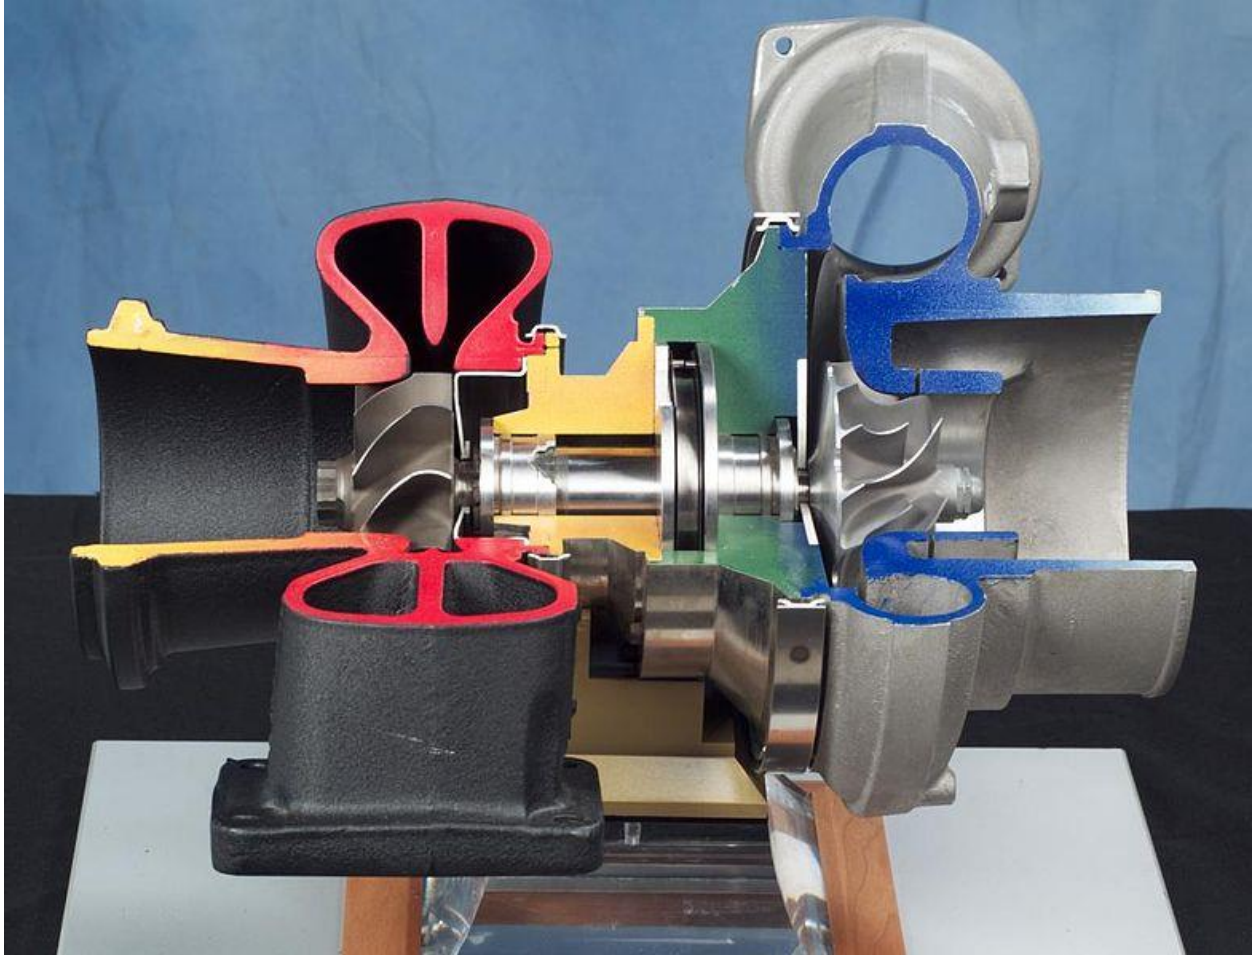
Cut-away view of a turbo-charger showing the centrifugal compressor (blue) on the right end of the rotor.
